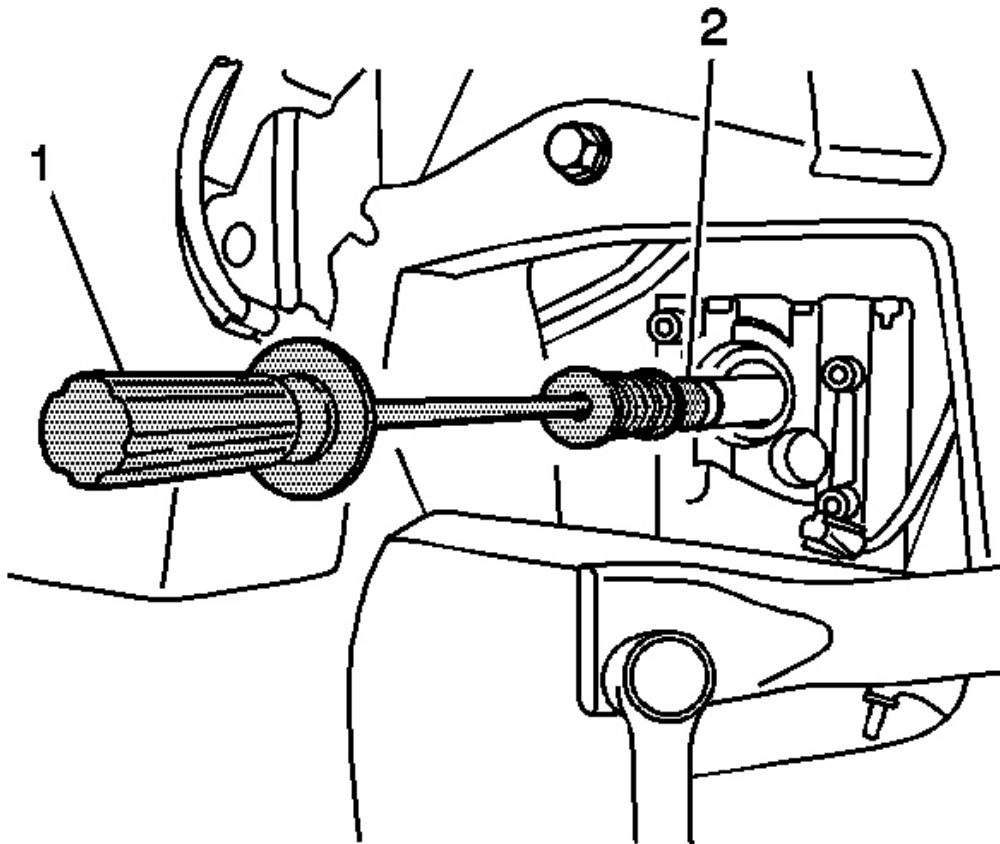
Identifying Slide Hammer & Axle Remover Adapter
